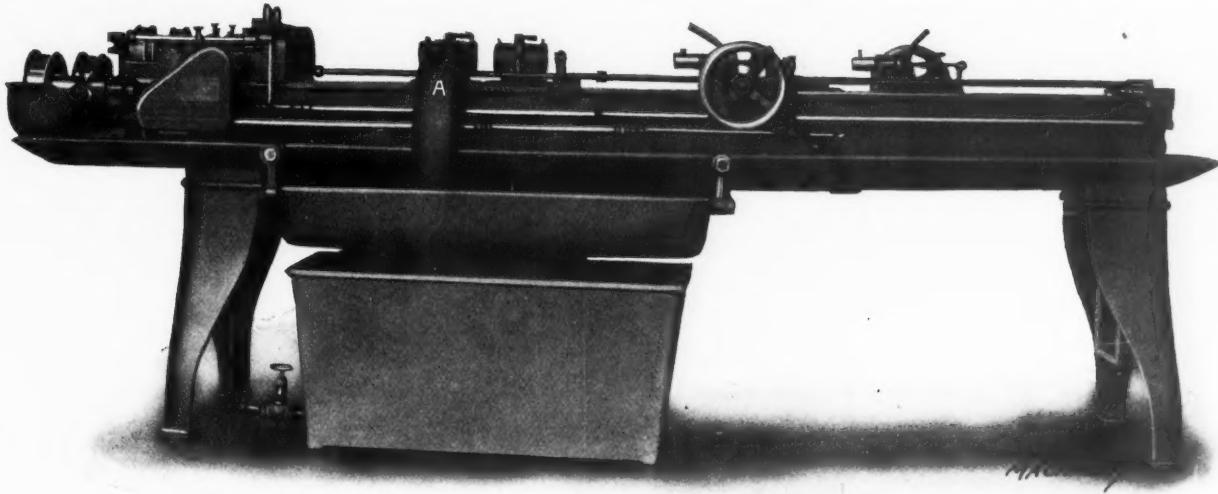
Rifle Barrel Drilling Machine built by the Diamond Machine Co.
